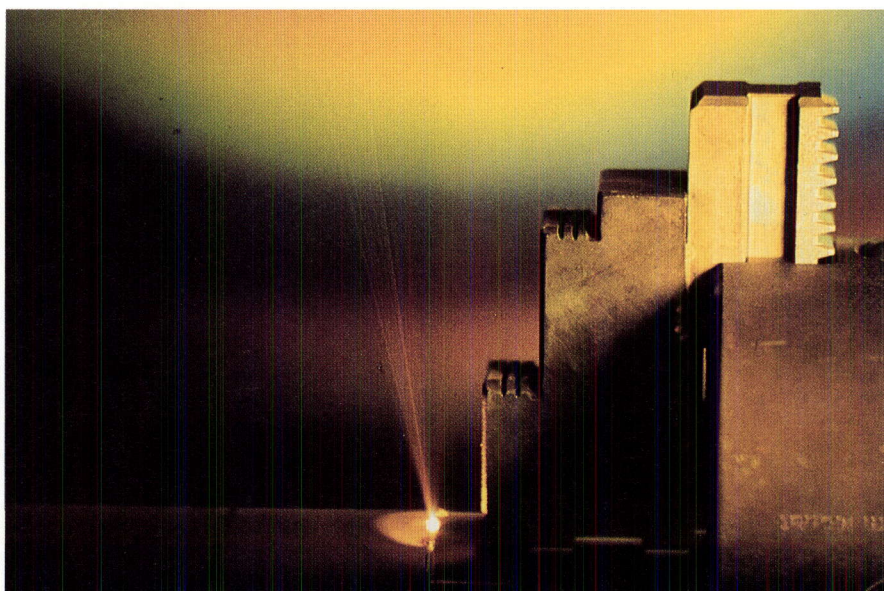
Electron beam welding of test components for irradiation in the HFR Petten
